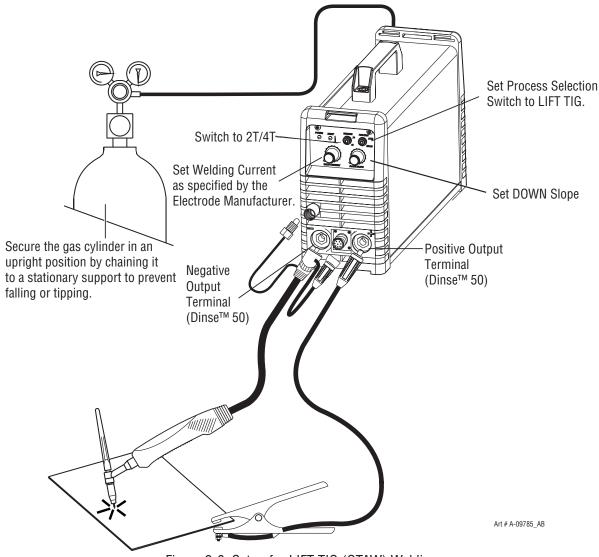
Setup for LIFT TIG (GTAW) Welding
